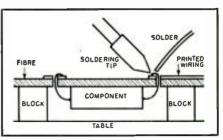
When making repairs to a printed wiring board, support it as shown.
